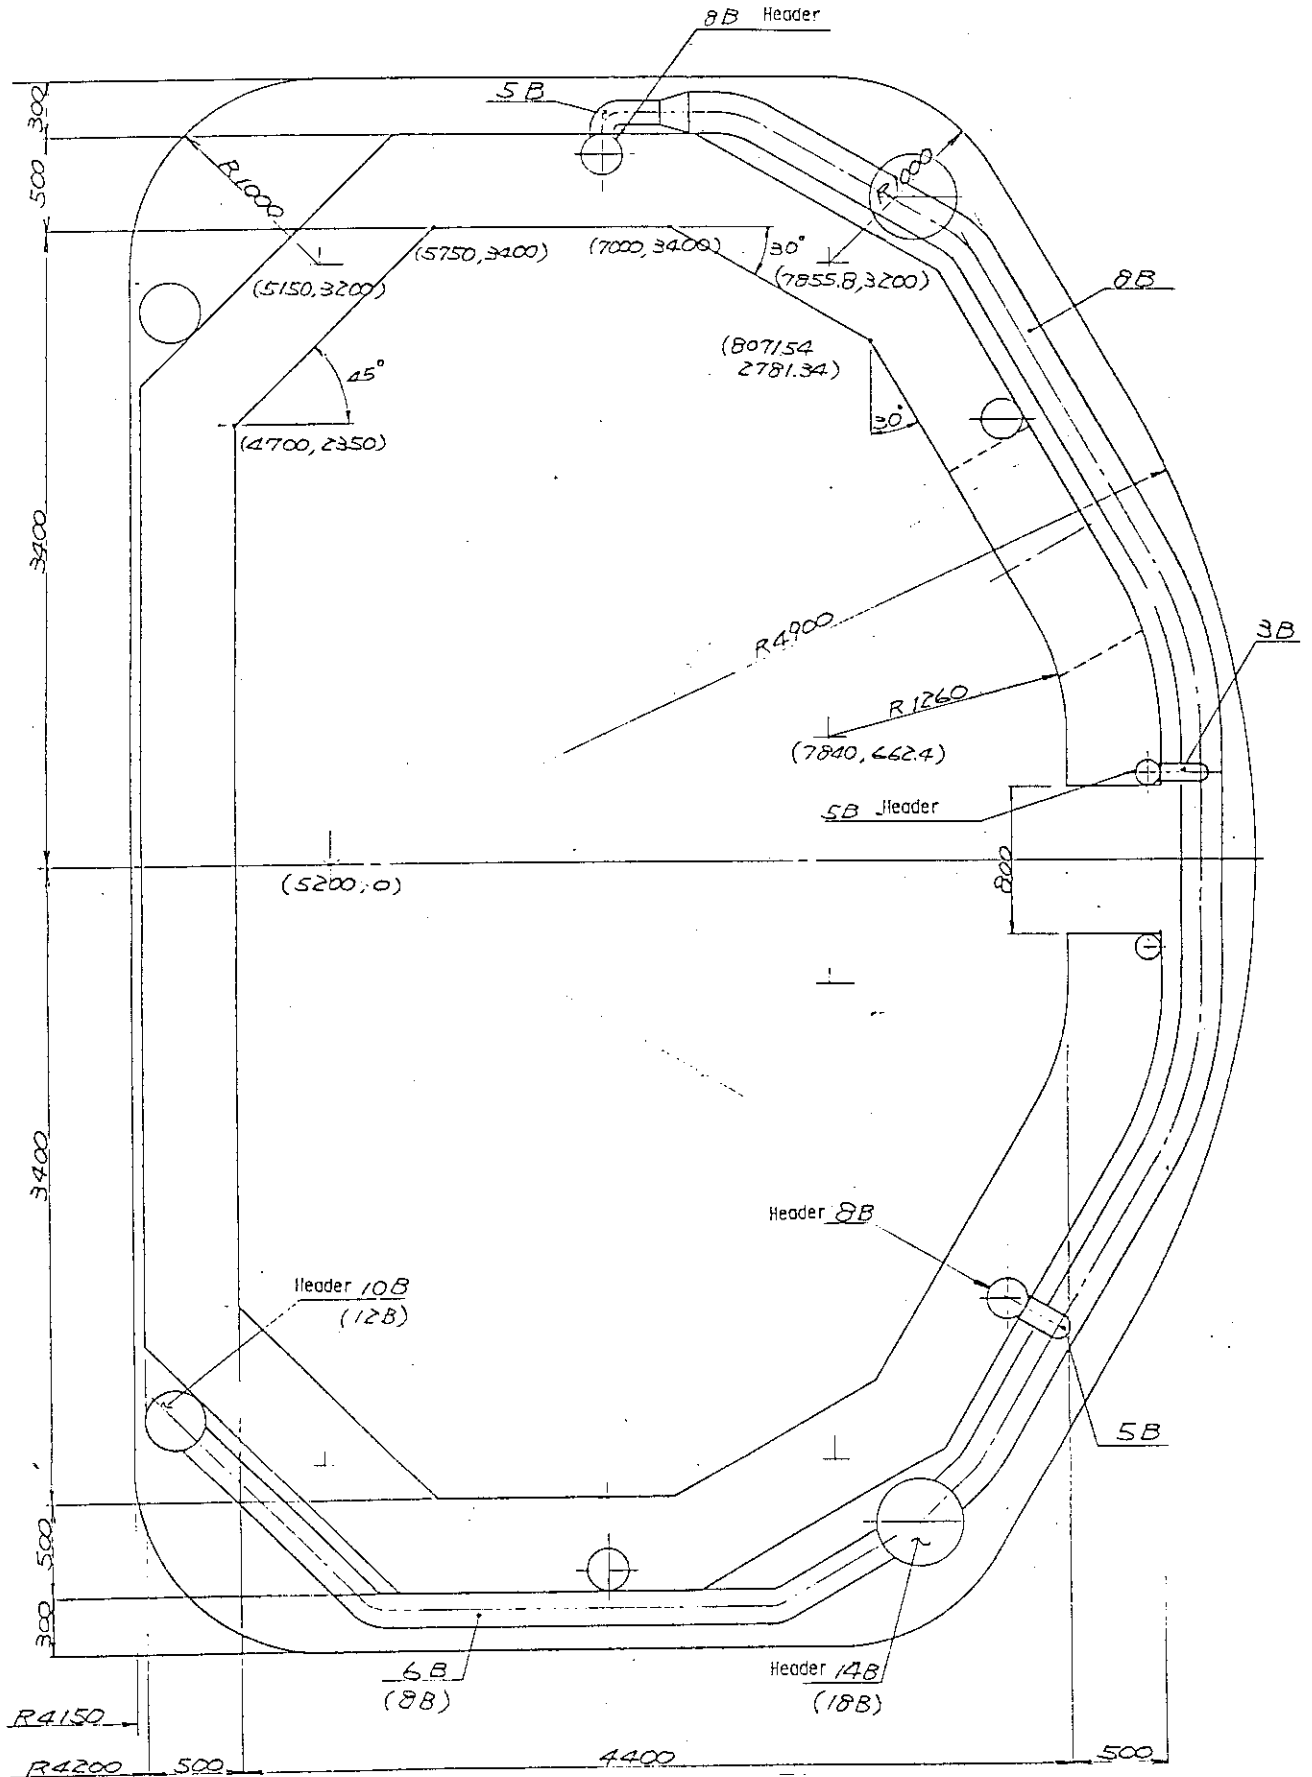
SPTR Power Plant (Elevation View of Blanket Piping)
